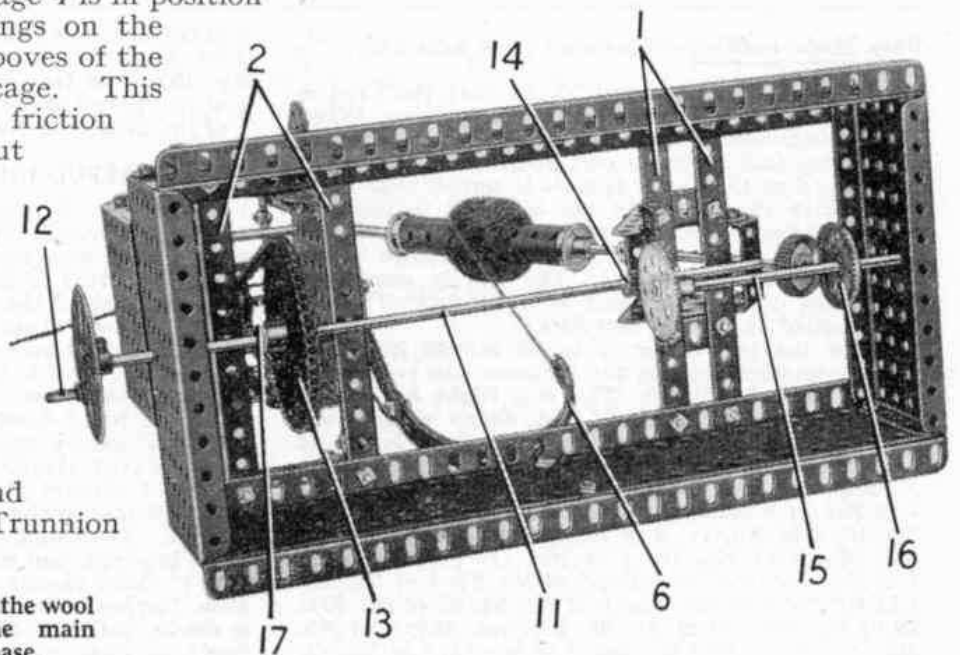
An underneath view of the wool balling machine showing the main driving shaft housed in the base.
